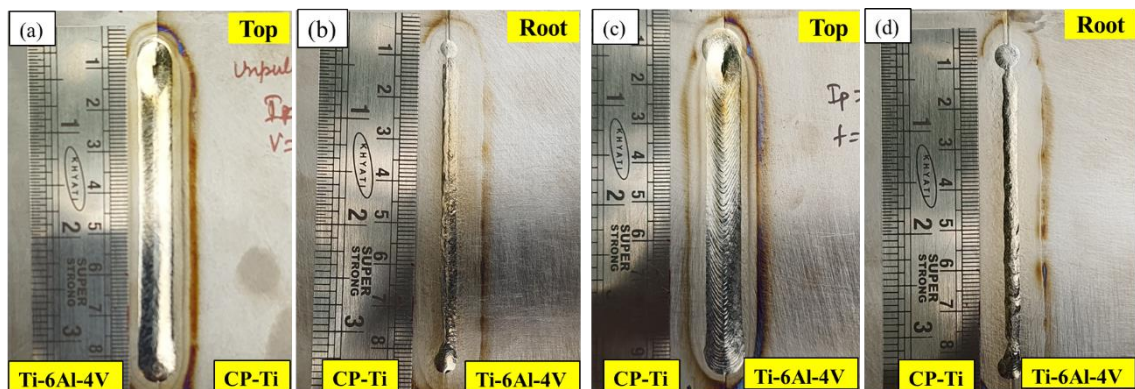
Dissimilar titanium alloys (Ti-6Al-4V/CP-Ti) welds: (a, b) top and root side of the weld prepared using conventional GTAW; (c, d) top and root side of the weld prepared using p-GTAW
